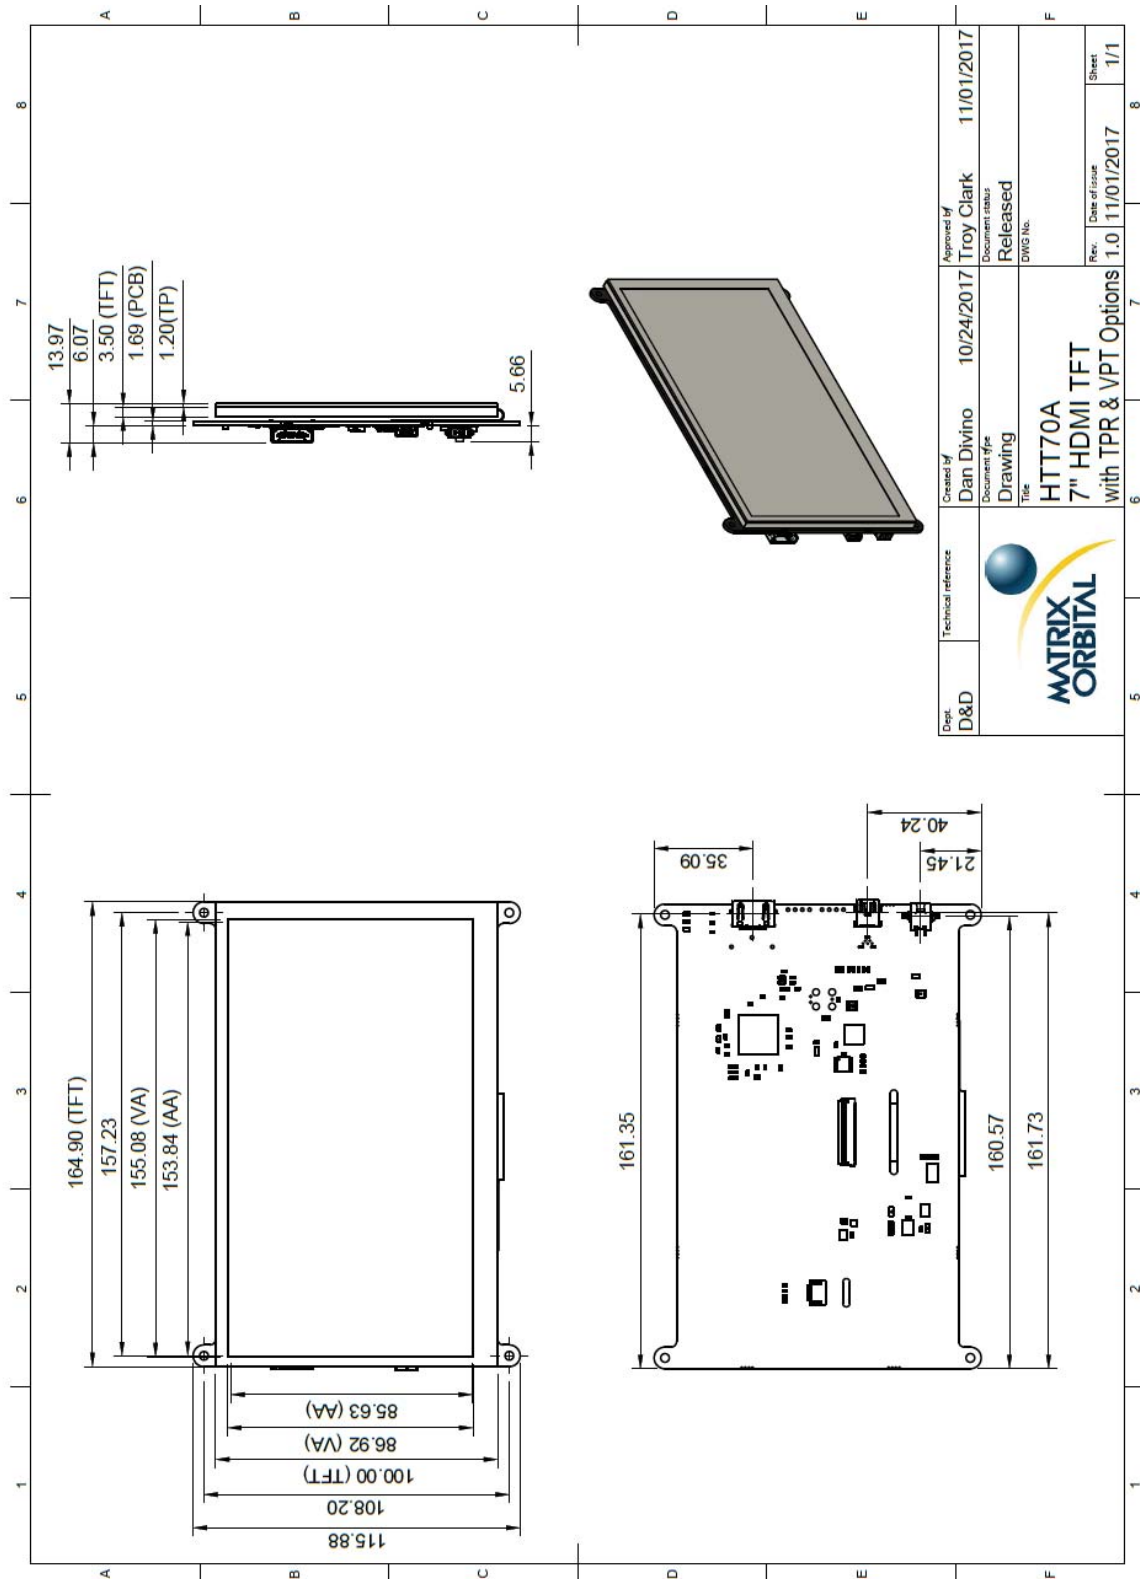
Resistive Touch Panel HTT70A Dimensional Drawing
